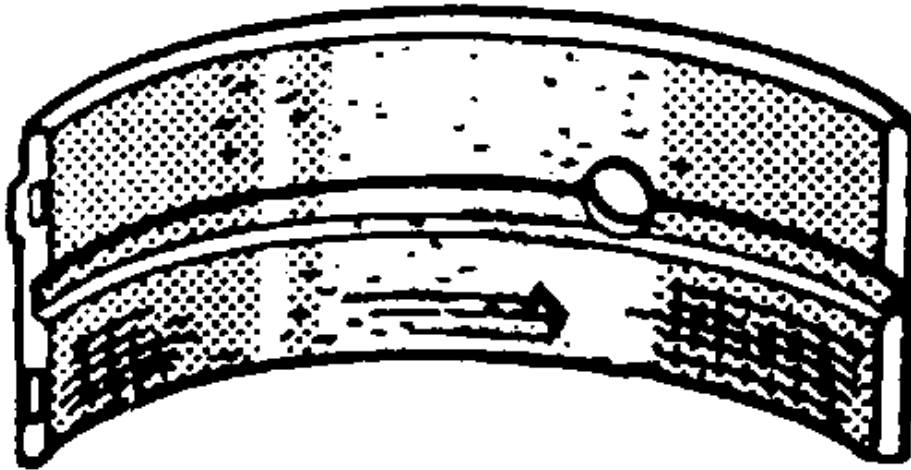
Identifying Connecting Rod Bearing Scoring Or Discoloration
